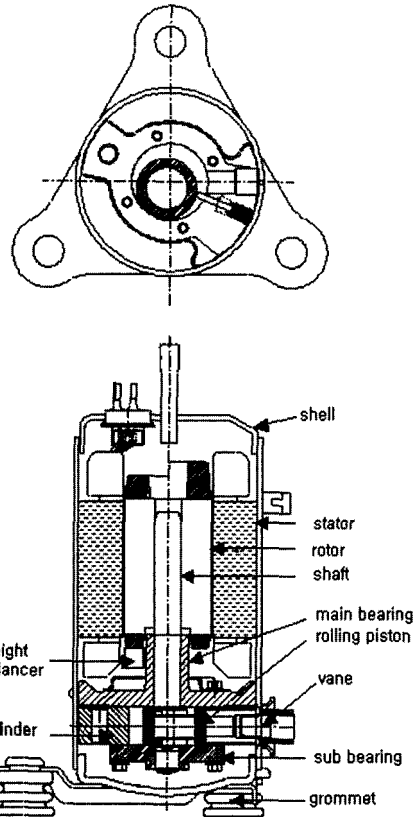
Schematic view of a rolling piston type rotary compressor.
